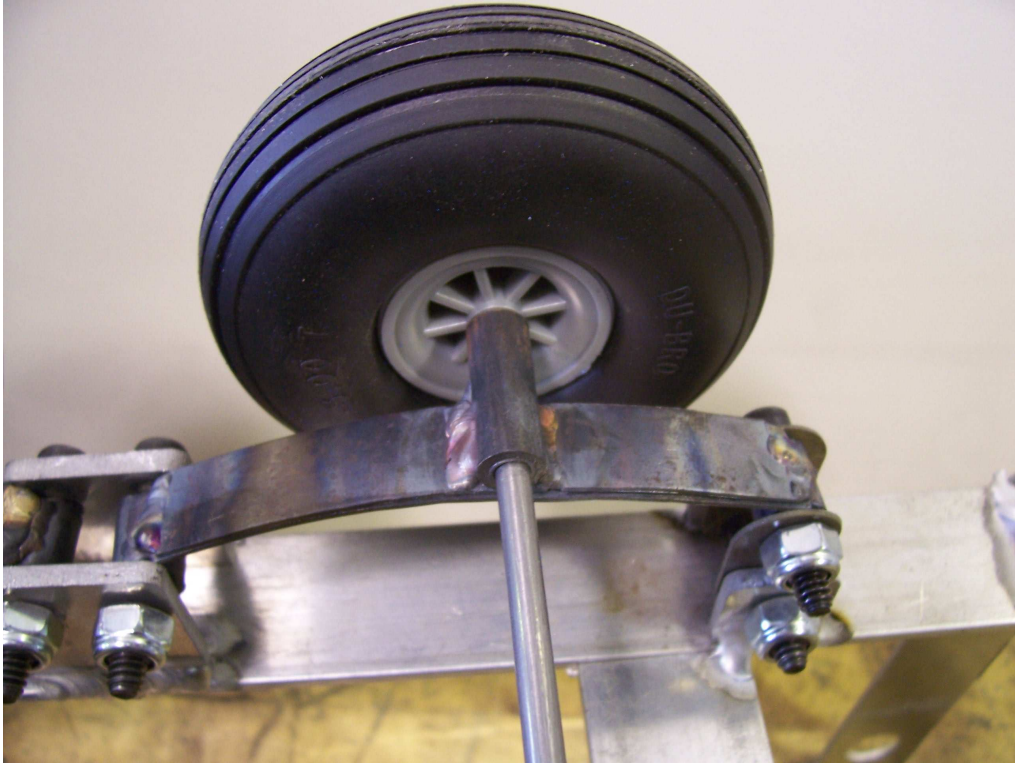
This shows the sleeve, welded to the front right leaf spring, and the spacing effect that it has for the wheel itself.
